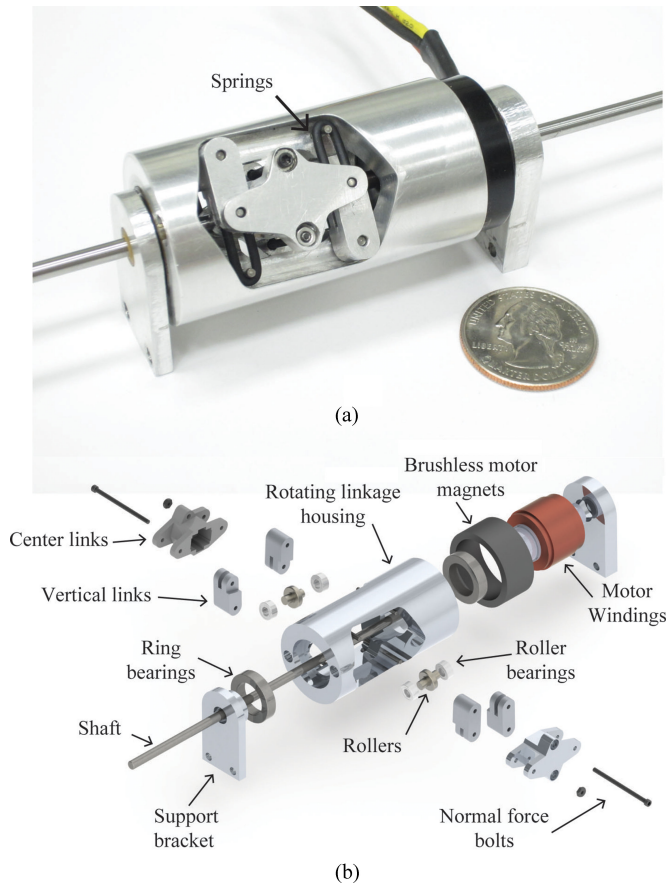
Passively adaptive rotary-to-linear CVT. (a) Physical prototype with a US quarter for size reference. (b) Exploded view shows the component of the linkages, housing, and integrated brushless motor that rotates the entire housing around the shaft.
